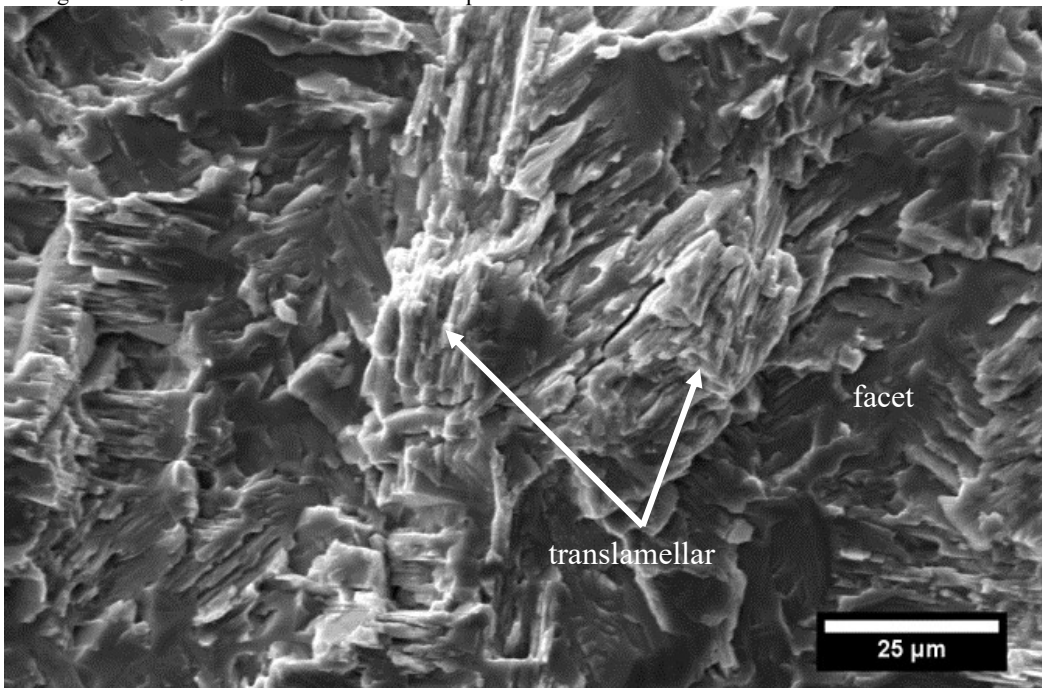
Representative fatigue crack SEM-SE fractography of as-cast (T-L) fatigue fracture features in the overload regime at  $R = 0.1$ . Crack direction is from top to bottom.
